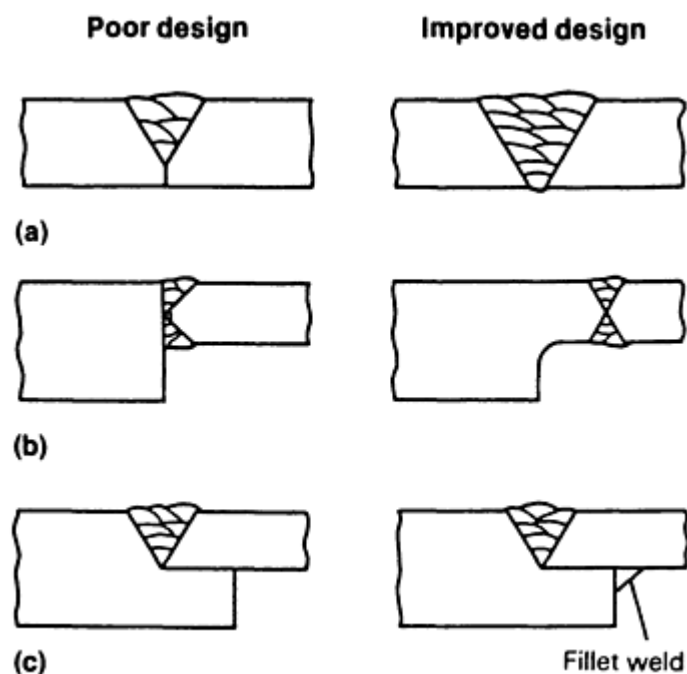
MODIFICATION OF JOINTS TO PRODUCE OPTIMUM WELD. (A) PARTIAL JOINT PENETRATION WELD (LEFT) CHANGED TO COMPLETE JOINT PENETRATION WELD (RIGHT). (B) PART MODIFIED TO ALLEVIATE PROBLEMS CAUSED BY CHANGES IN METAL THICKNESS. (C) ADDITION OF SECONDARY FILLET WELD TO REDUCE STRESS CONCENTRATIONS OF PRIMARY WELD. SOURCE: REF 1
